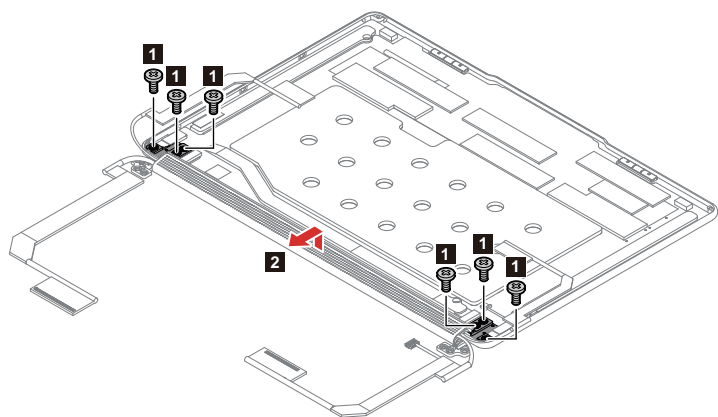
Remove screws and remove the sound bar hinge with cable assembly
